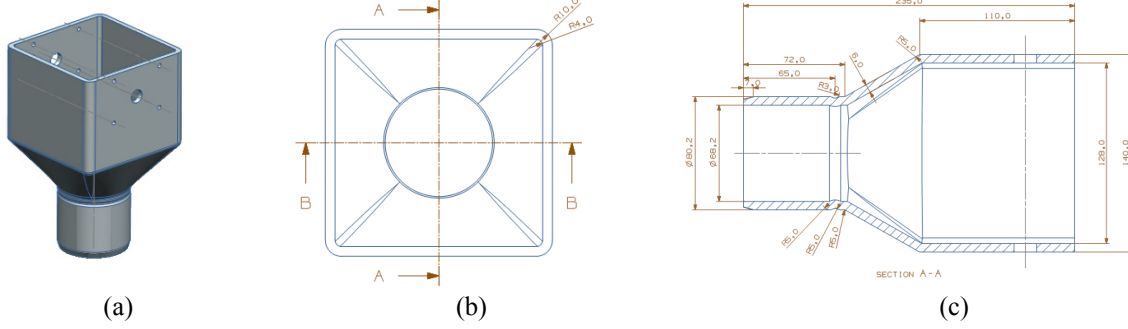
Universal cup design - (a) 3-D view of cup, (b) Front view of cup (c) Section A-A
